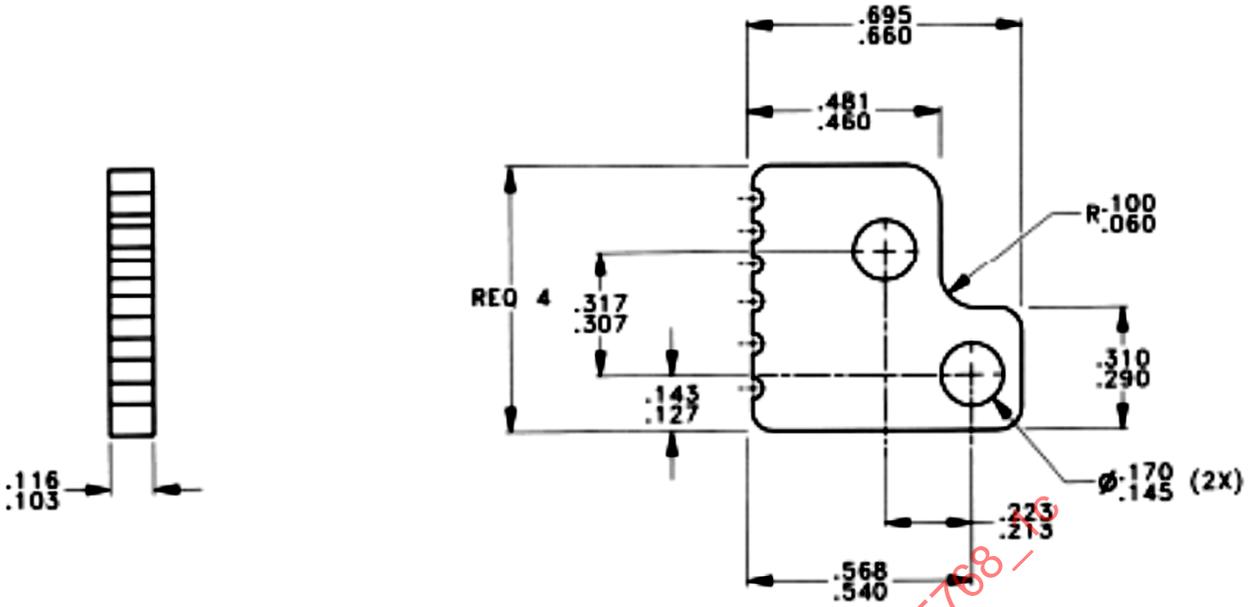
A - LOWER BLADE ASSEMBLY DIMENSIONS (SEE TABLE 2)
